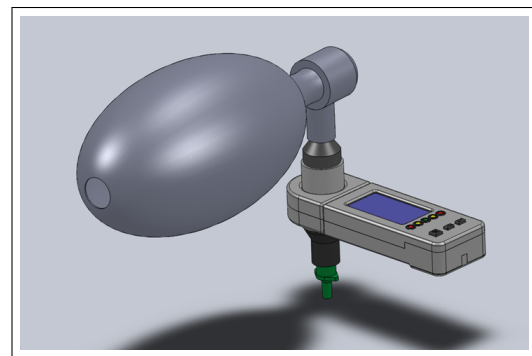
CAD model presenting how the prototype will be combined with an inflation bag
